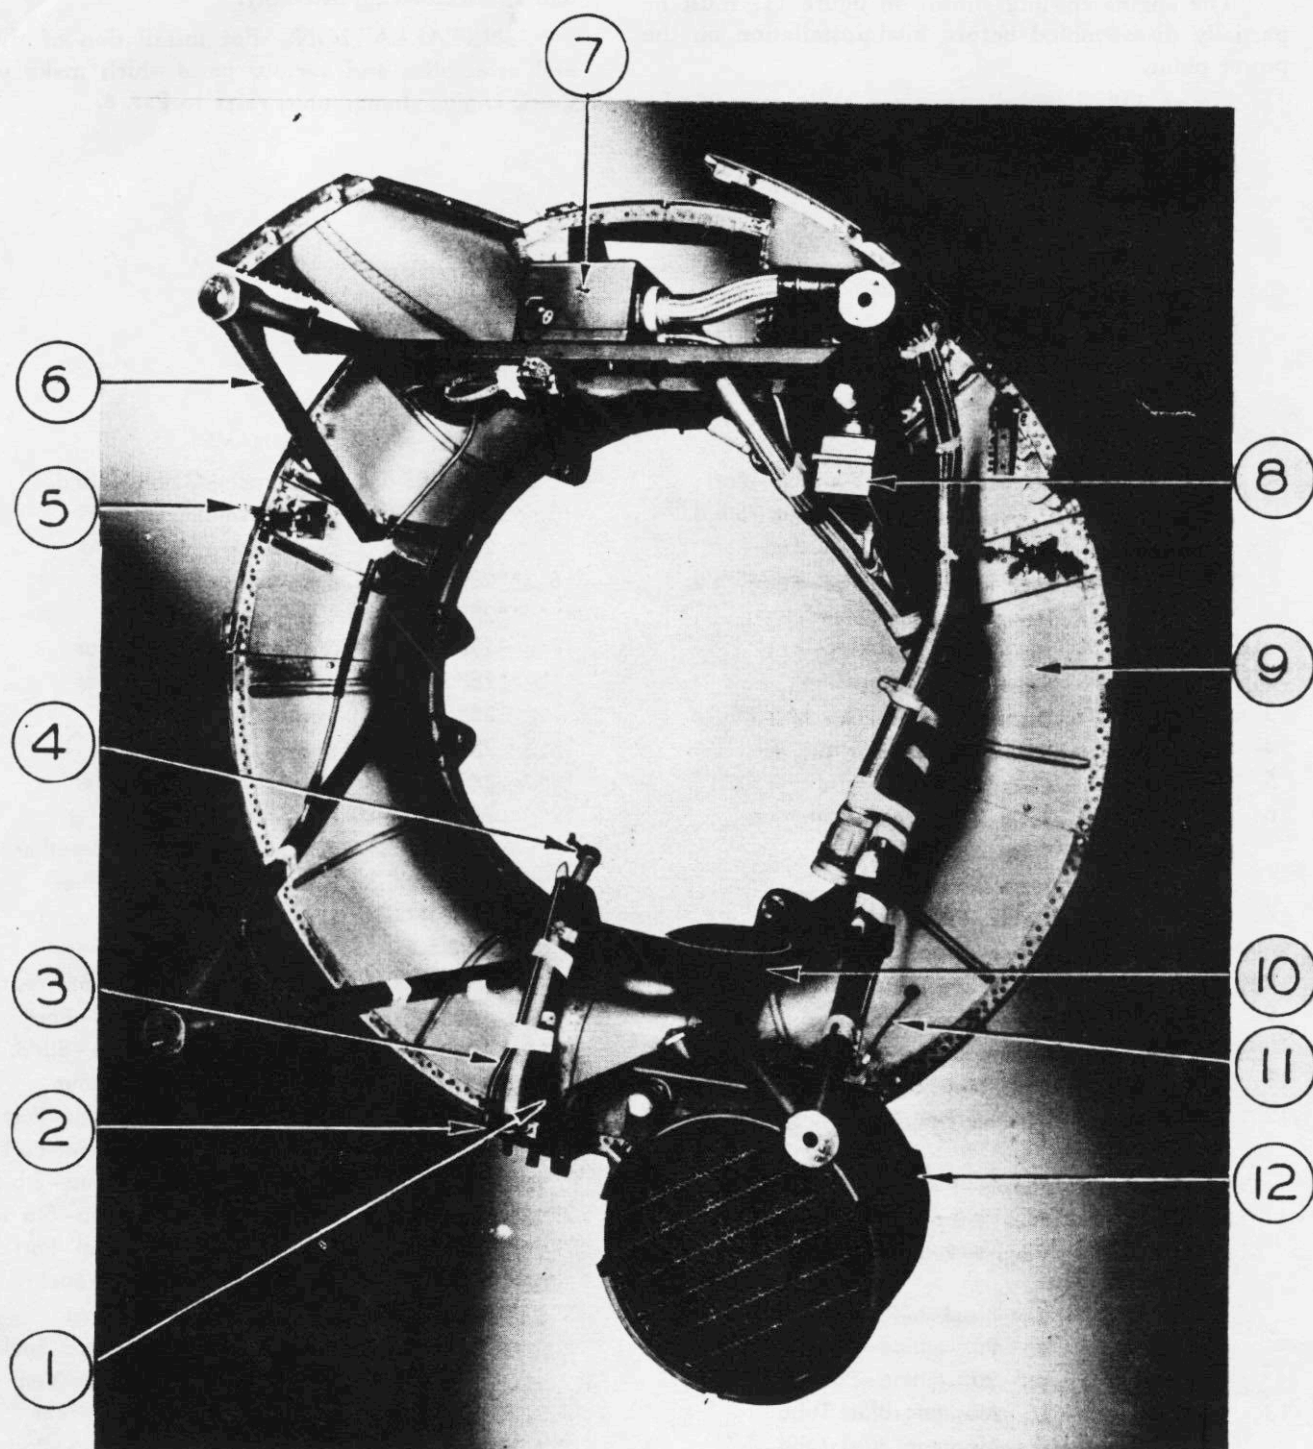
Quick Engine Change Unit—Engine Mount and Shroud Assembly
